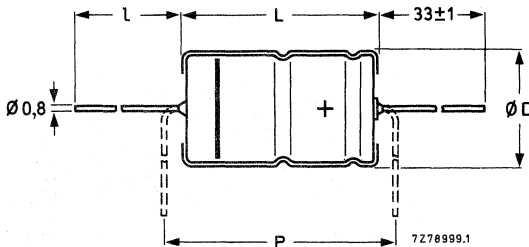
Style 1; see Table 1a for dimensions D, L, l and P.
